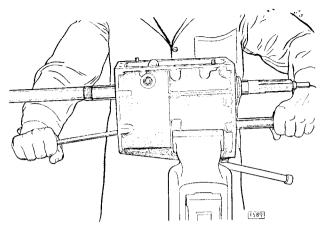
Lifting the layshaft into mesh and inserting dummy countershaft.
